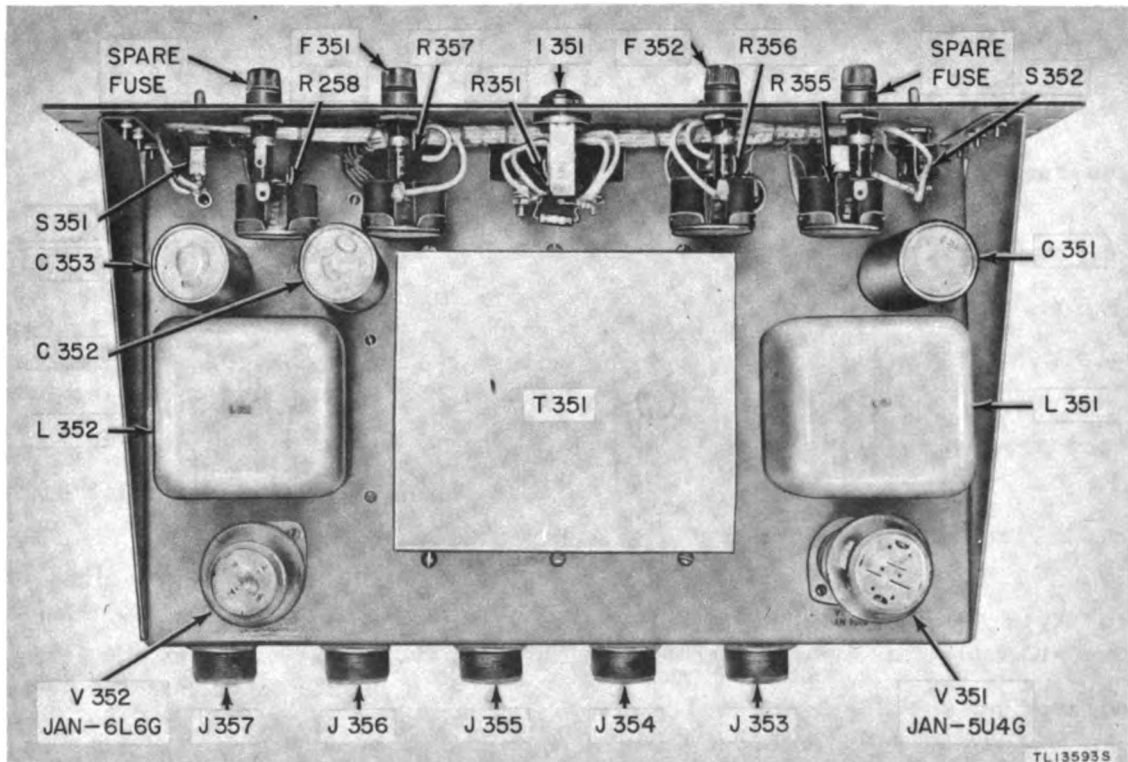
Control-rectifier-Power Unit PP-135/CRD-3 tube and parts locations, top view.
